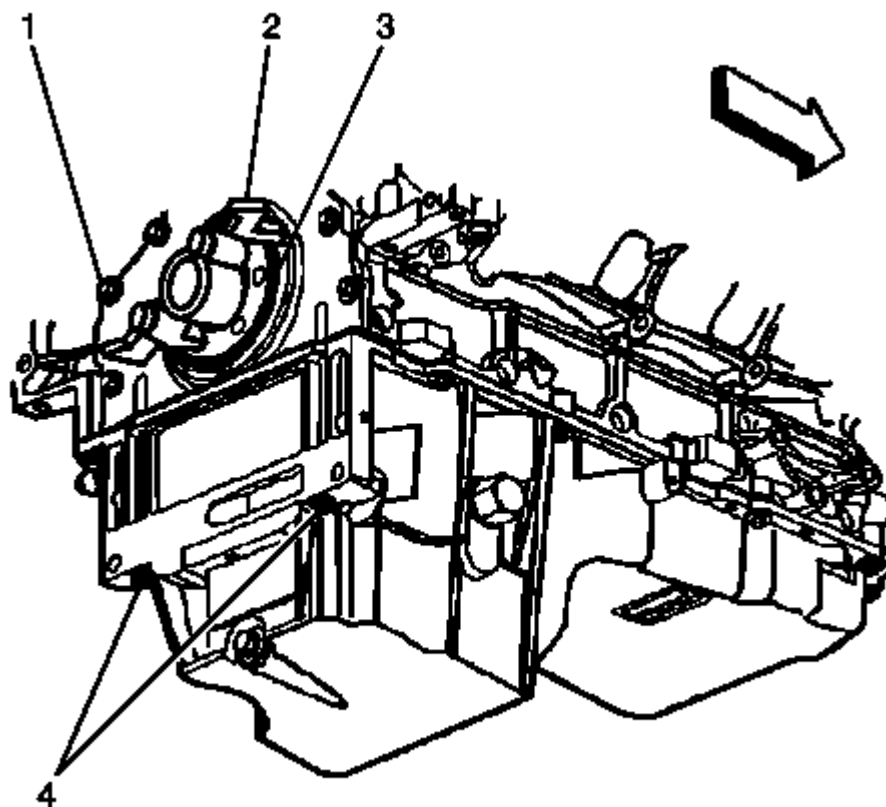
Identifying Oil Pan To Rear Housing Bolts
